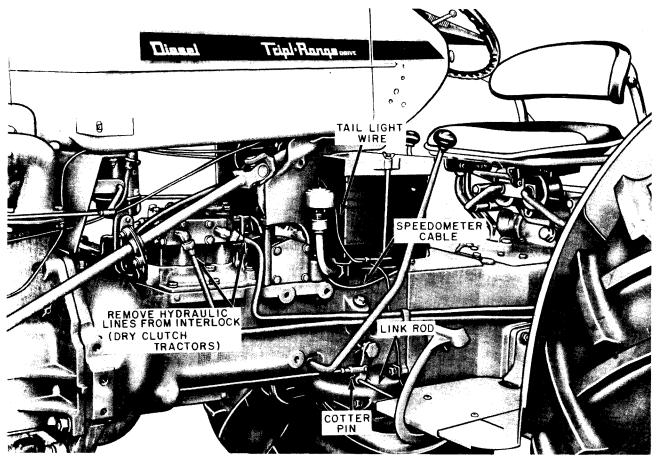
Preparing Tractor for Splitting at Rear of Torque Tube - L.H. View
